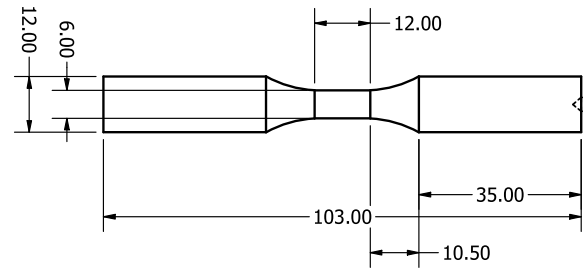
Fatigue specimen geometry in mm according to ASTM E466 [24].
